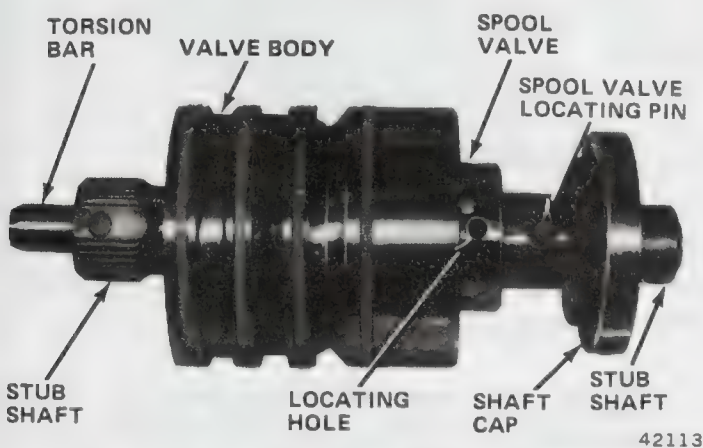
K-78 Valve Body/Stub Shaft Disassembly
